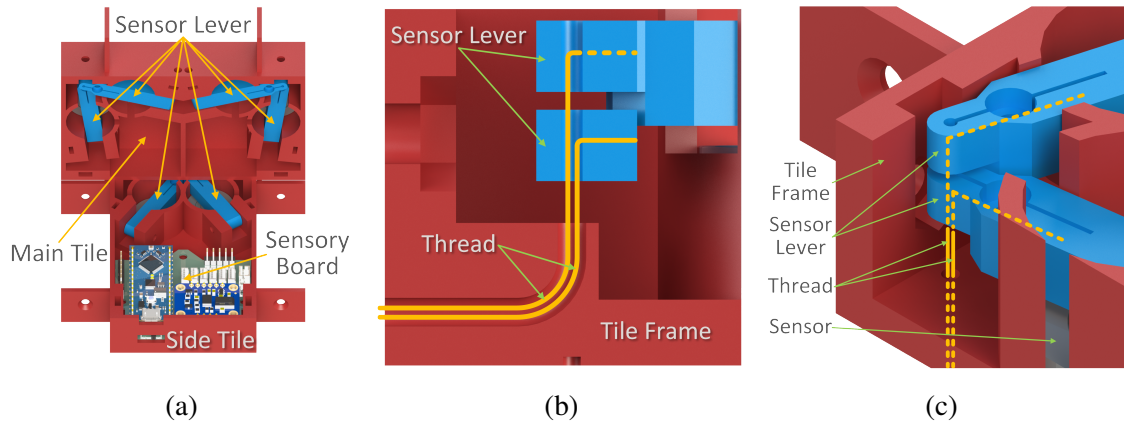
The force measurement design of the STeM. (a) The load cells arrangement inside the tiles. (b) The cross section view of “L” shaped thread guide slot. (c) The cross section view of the stacked lever design.
